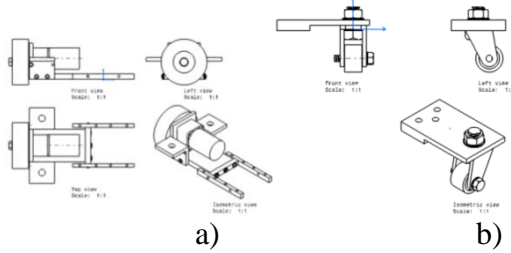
a) Wheel motor assembly b) castor wheel assembly
